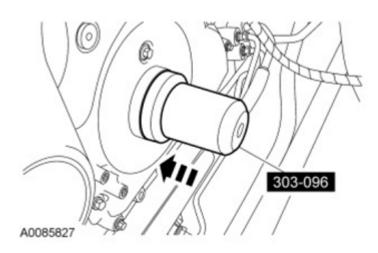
Installing Crankshaft Front Oil Seal Courtesy of FORD MOTOR CO.
